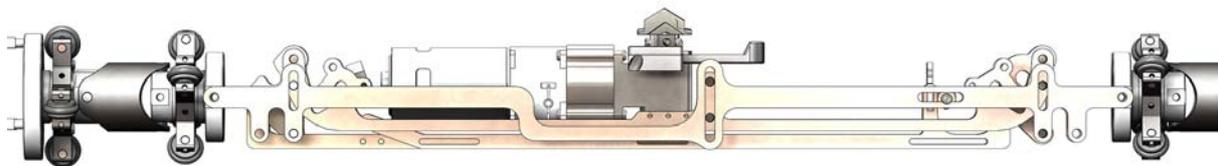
Wall Press drive module* – This moved all other modules laterally through the 90mm PE pipeline.
